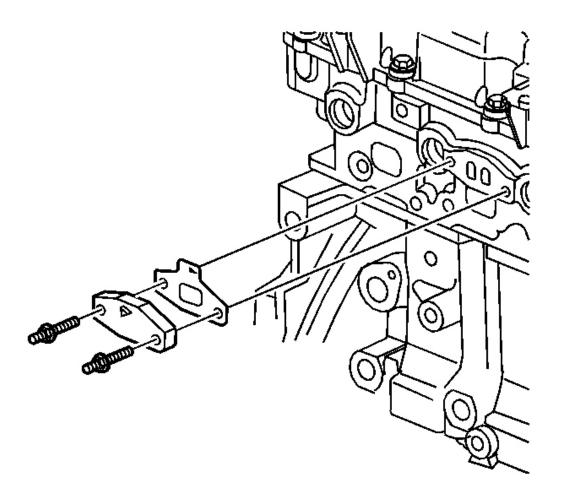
View Of A.I.R. Injection Pipe Cover Courtesy of GENERAL MOTORS CORP.
